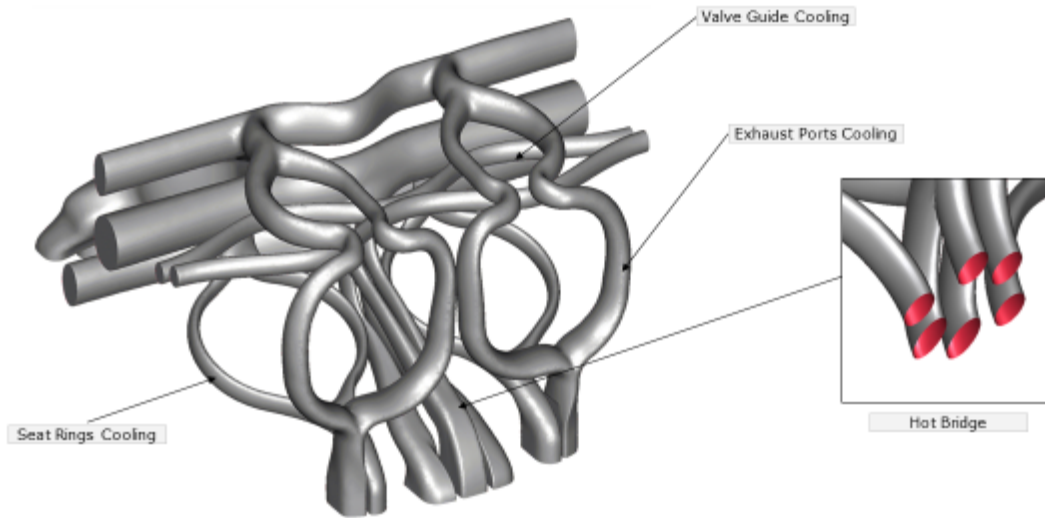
Additive Manufacturing Water Jacket – Detailed Hot Bridge
